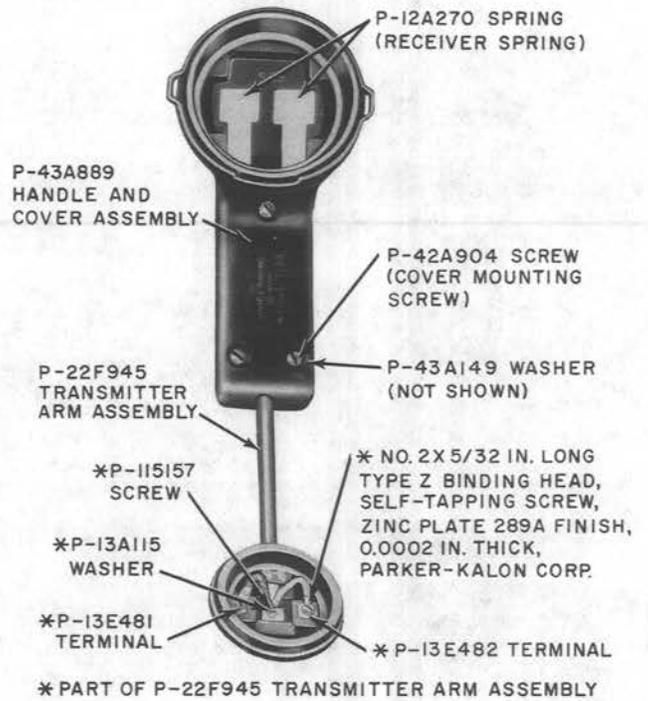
Handle, Cover, and Transmitter Arm Assembly With Receiver and Transmitter Units Removed (53R Head Telephone Set)
